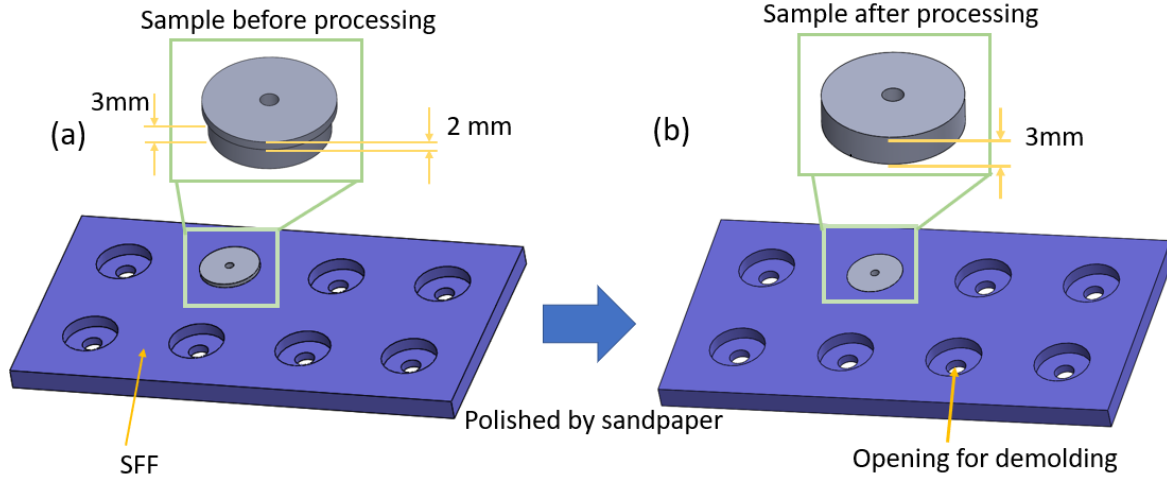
The main post processing process for calcified plaque surrogate: (a) Insert the specimen in to SFF. (b) Polish the surface by using sandpaper and remove the 2 mm thick edge on the top of specimen.
